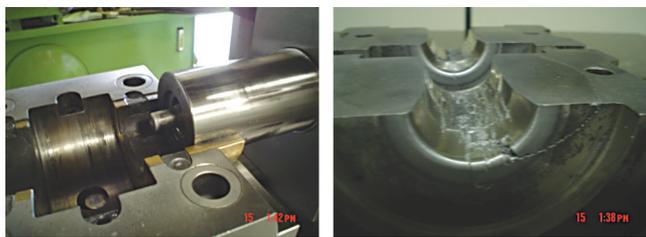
Failure of the steel insert of an assembly die during cold forging of a guide bush from Al alloy AA2014.
